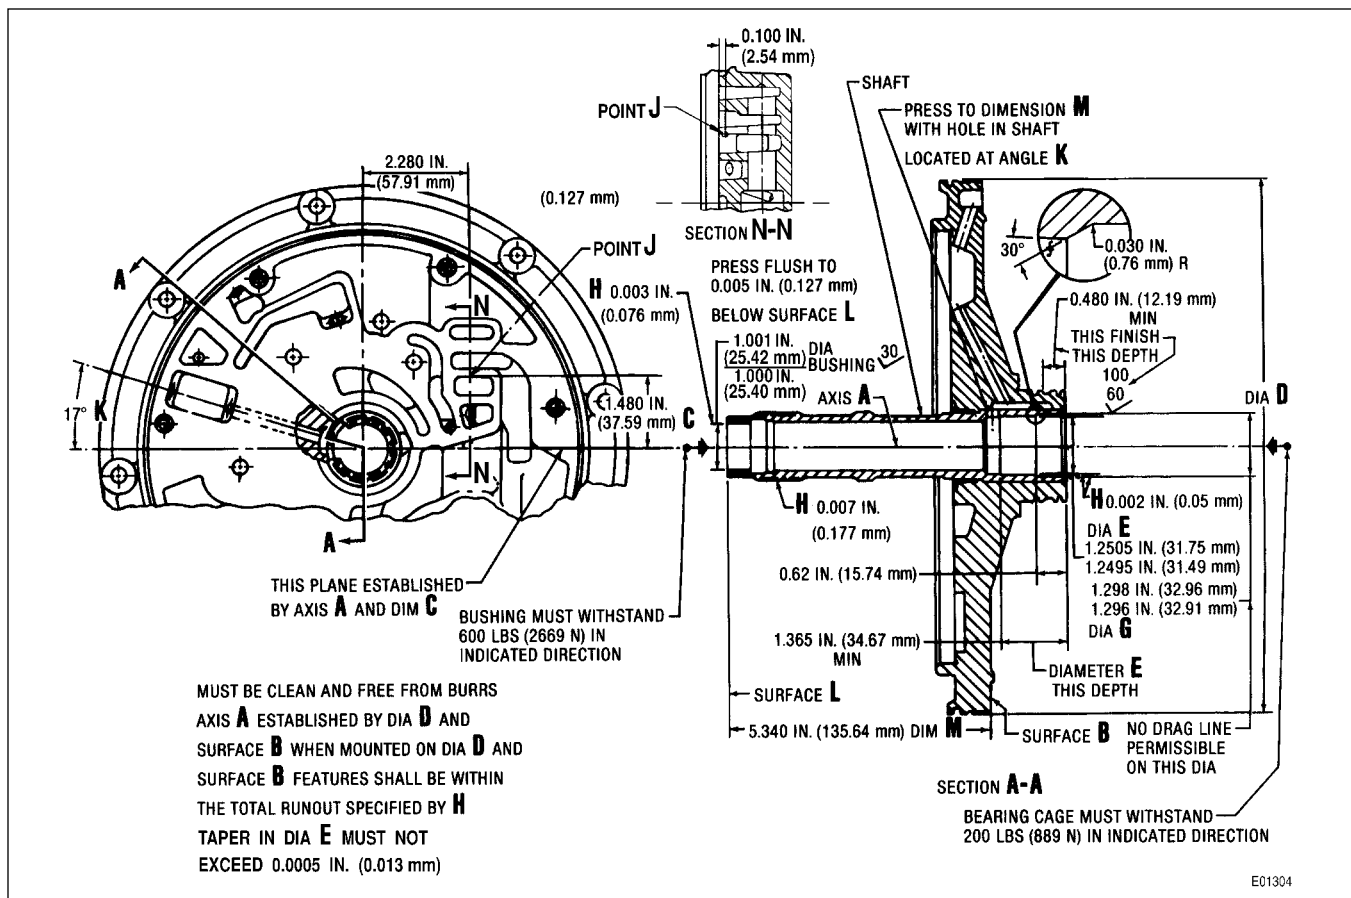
Installation of Stator Shaft, Machining of Bushing and Bearing Bores (AT 500 Series)
